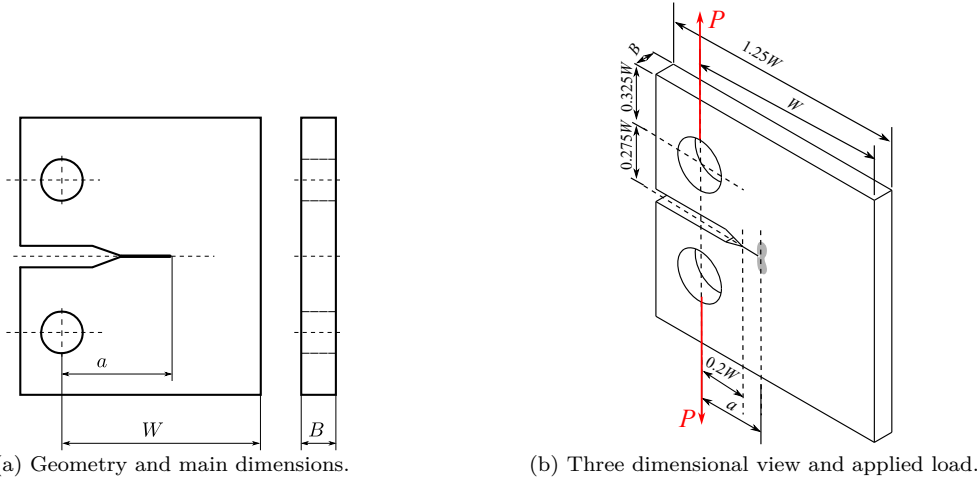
Compact-tension C(T) specimen for measurement of fatigue crack growth rates [42].
